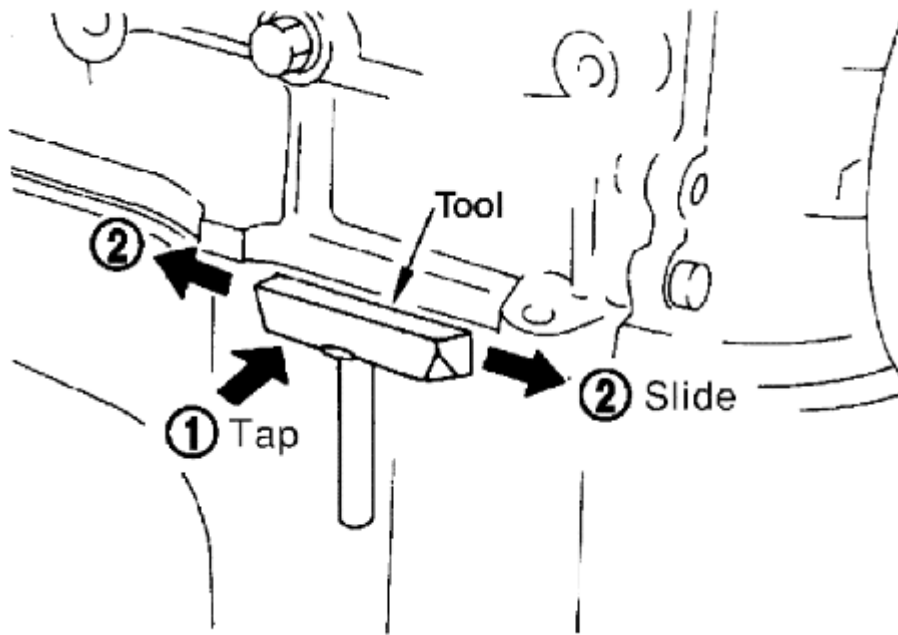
Removing Old Liquid Gasket Sealing Using Tool
